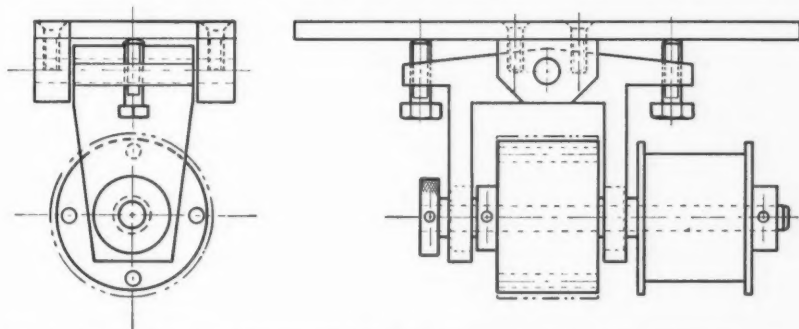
Assembly drawing of mounting and spindle carrying rubber covered wheel and drum.
